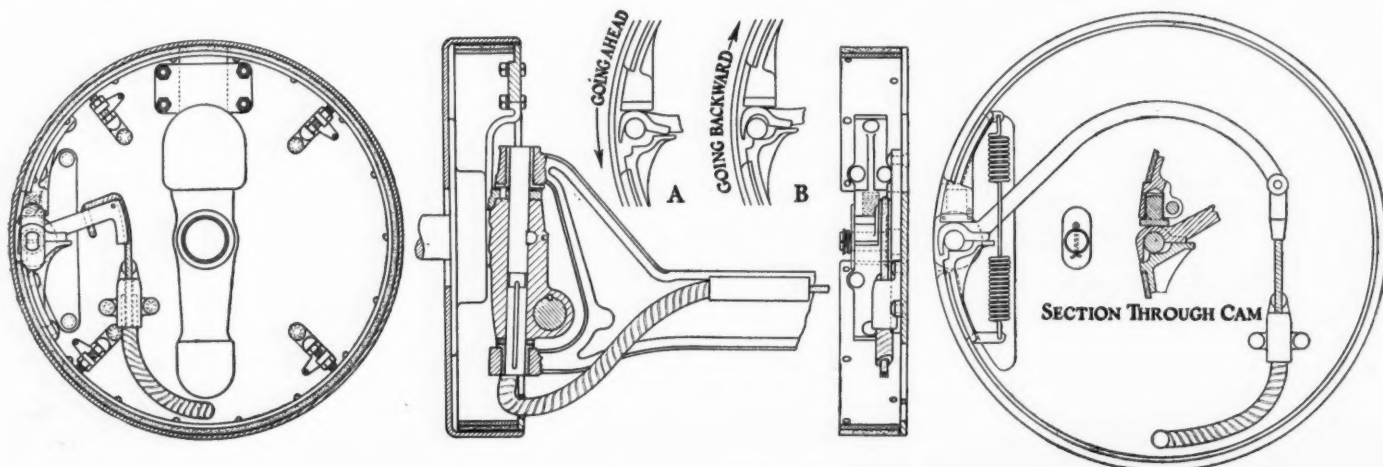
Sanford expanding band brake operated by cable. The hook shaped cam is integral with operating lever
